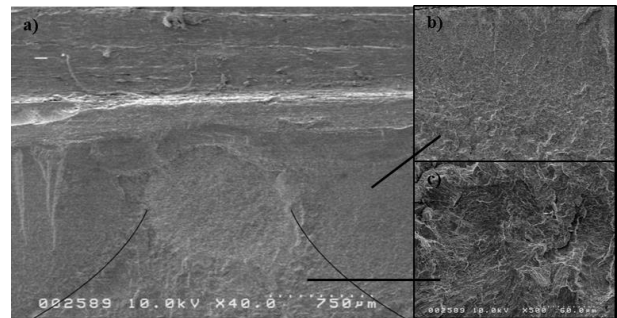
a) SEM image of two regions of fracture surface, b) upper brittle, c) lower ductile fracture.
